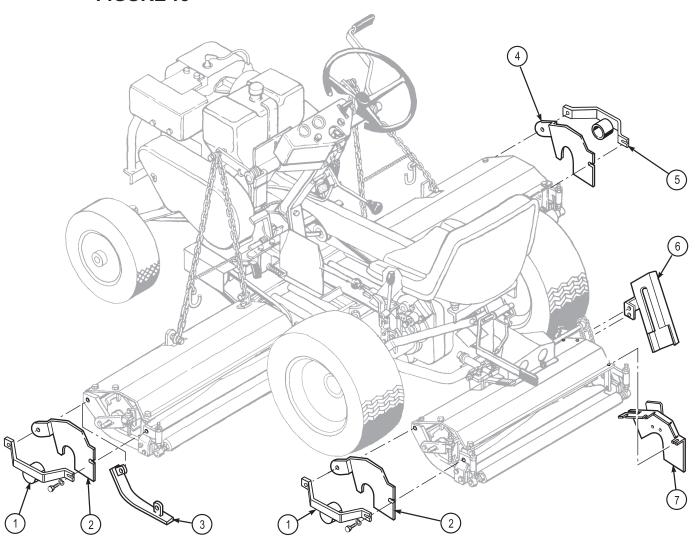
SKIDS, REEL END MOWER SHIELDS & GUARD
